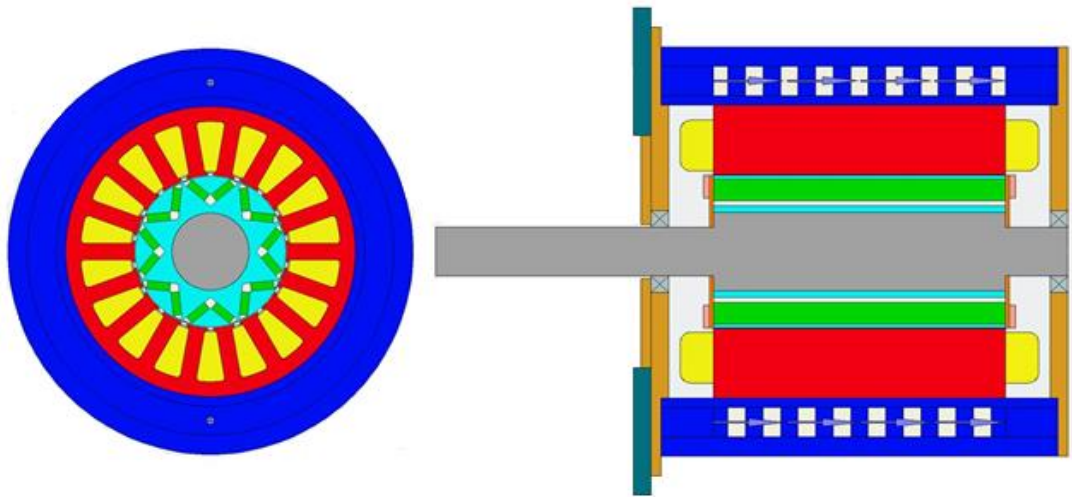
Radial and axial cross-section of the machine model in Motor-CAD.
